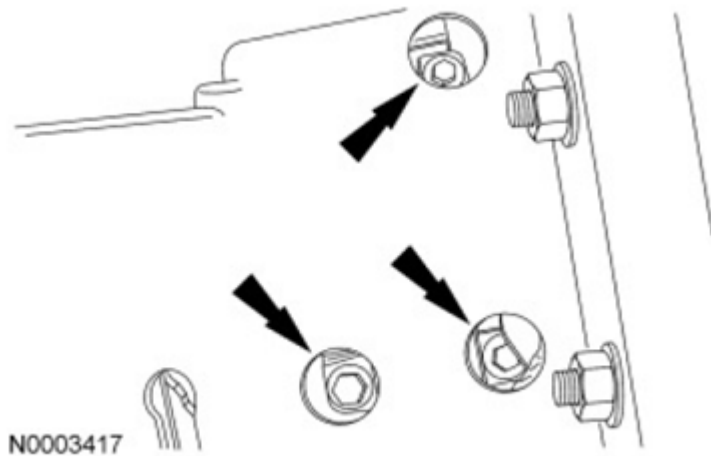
Locating Bolt Access Holes For A/C Compressor
